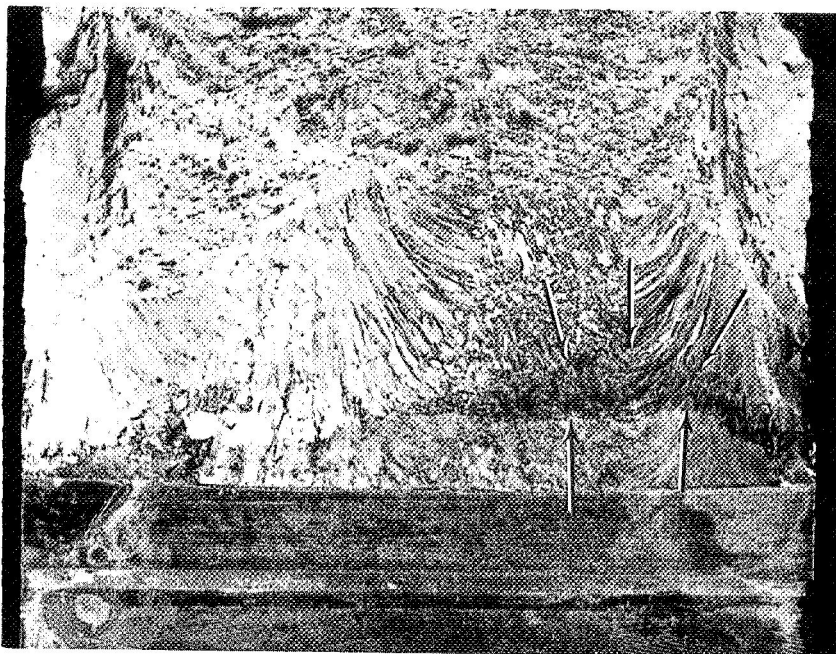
Fracture Face of Al X7007-T6 Compact Tension Specimen Showing Faceted Appearance and Area of Extensive Sustained Load Crack Growth
